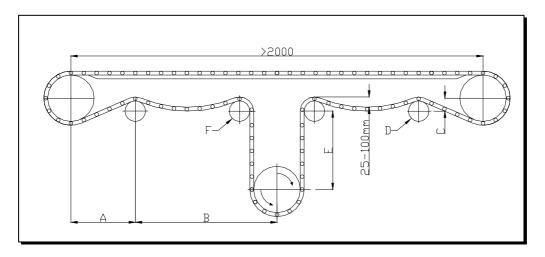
relates to longer and more heavily loaded conveyor systems. This conveyor system cannot be used in a reversing operation. The first support after the drive wheel ensures the best possible engagement. The second support should be located in a position where the weight of the belt "sag" between the first and the second support is sufficient to maintain the correct belt tension. This ensures continuous positive engagement from the sprockets on the drive wheel. Another advantage of this type of construction, which features a series of belt supports, is that it is possible to accommodate any belt contraction/expansion by fluctuating the degree of belt "sag" between all other supports.
